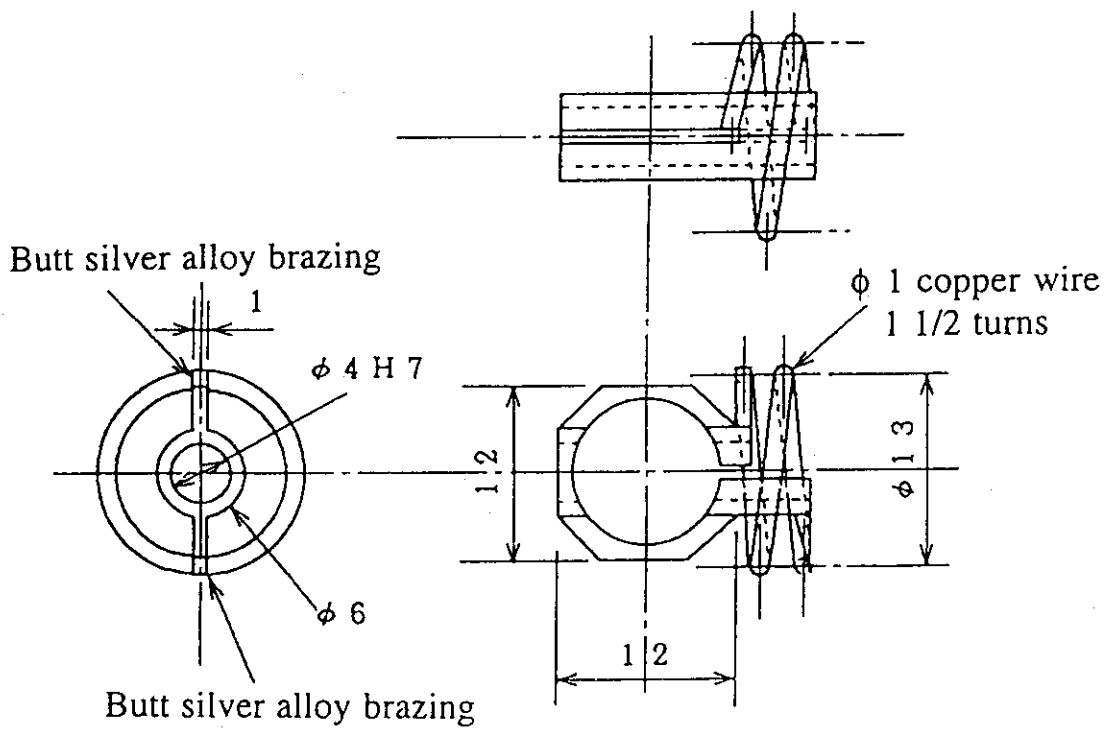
Drawing of the detection head of a transformer-coupled rotating magnetic probe.
